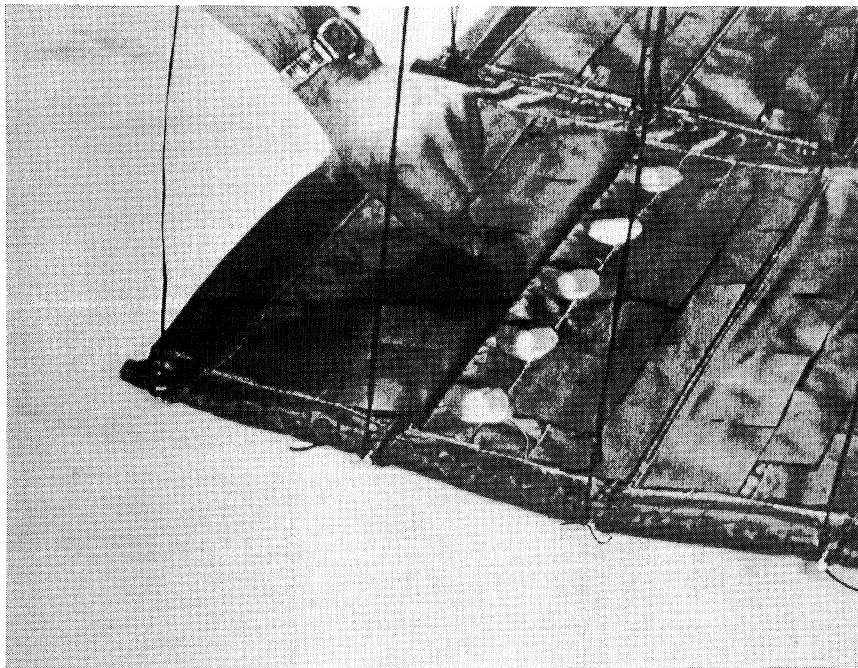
Assembly of the 8 in. Thick Wave Blanket
